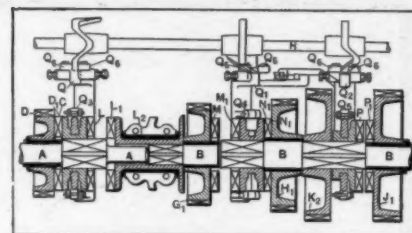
Arrangement of a main shaft and position of clutches on the first speed gear
